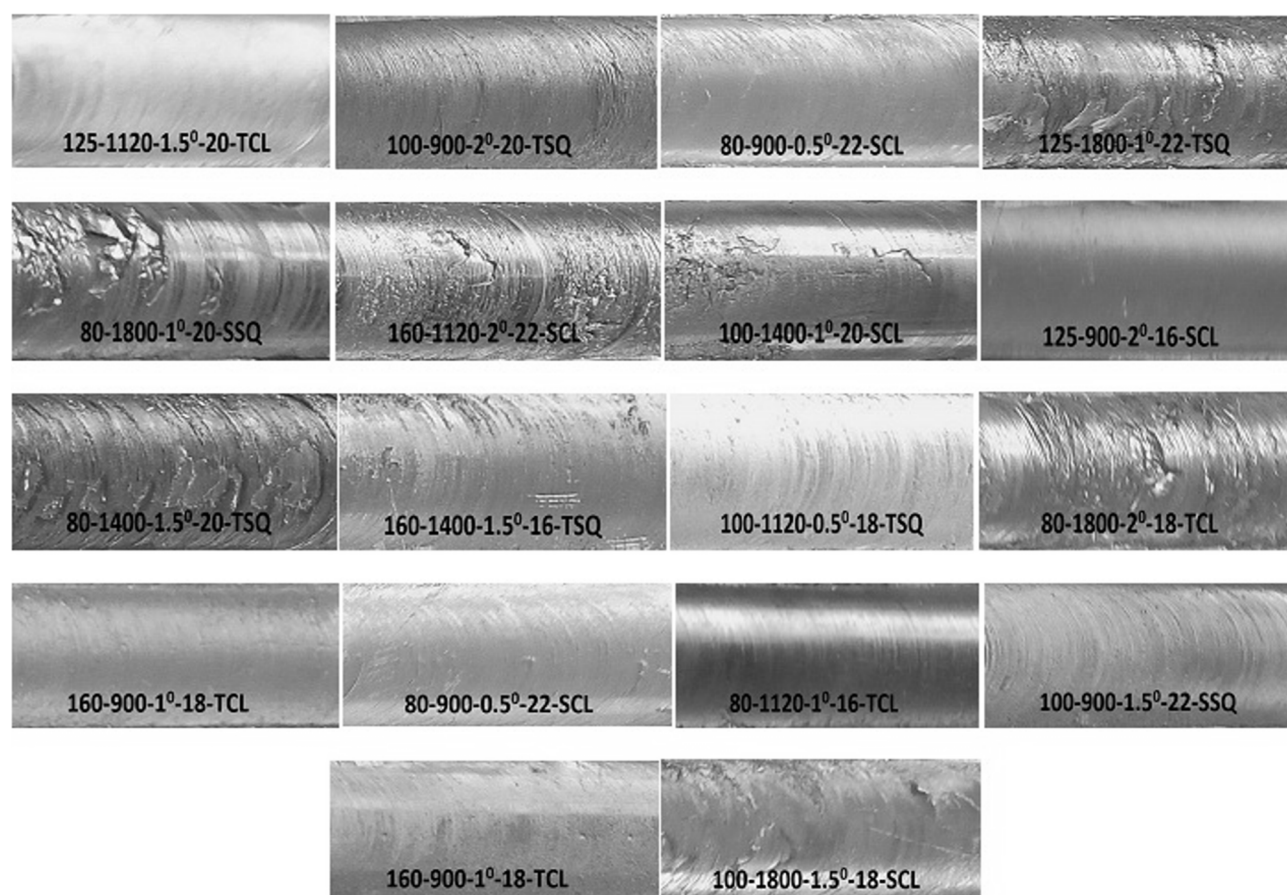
Macrographs of weld beads obtained from the experimentation [TS–RS–TA–SD–TPP]
